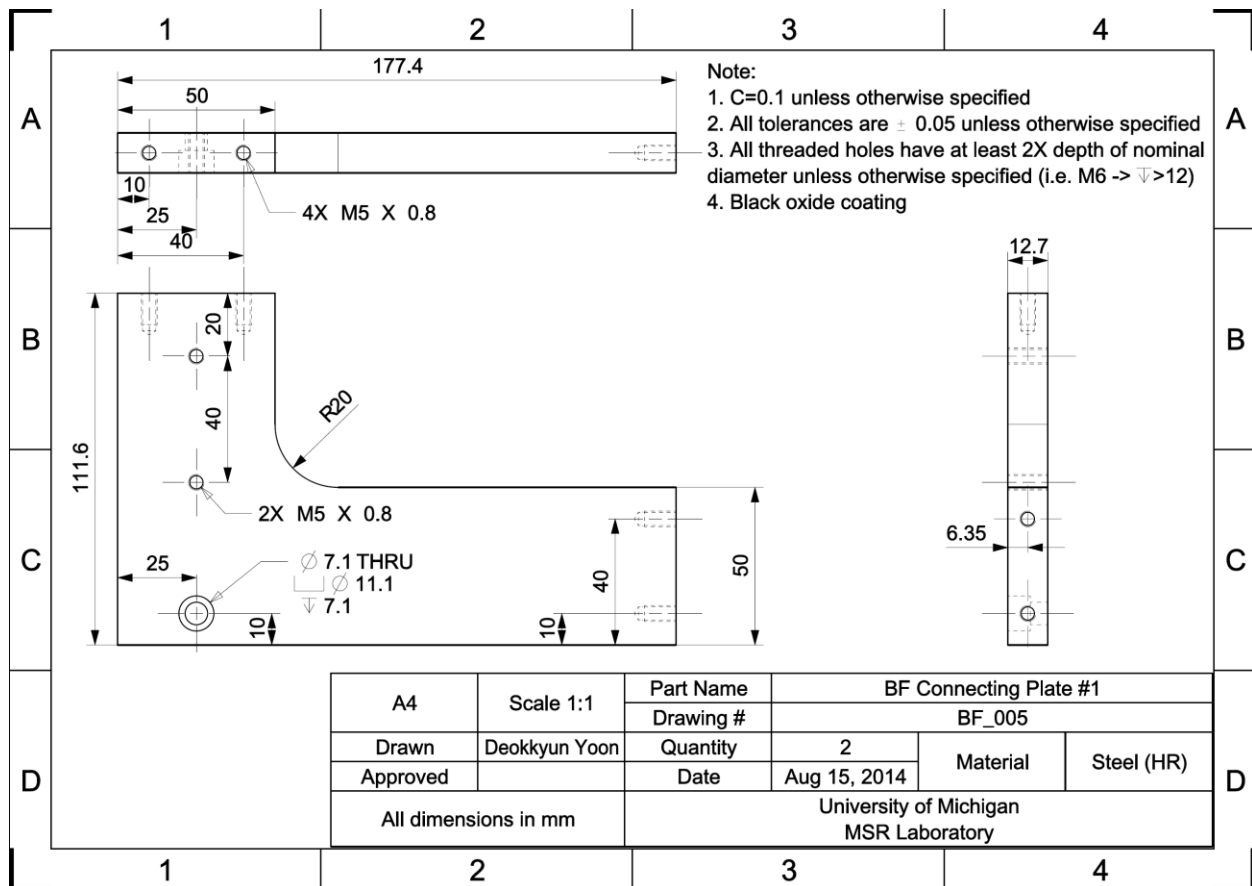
Manufacturing drawing of Base Frame Connecting Plate #1.
